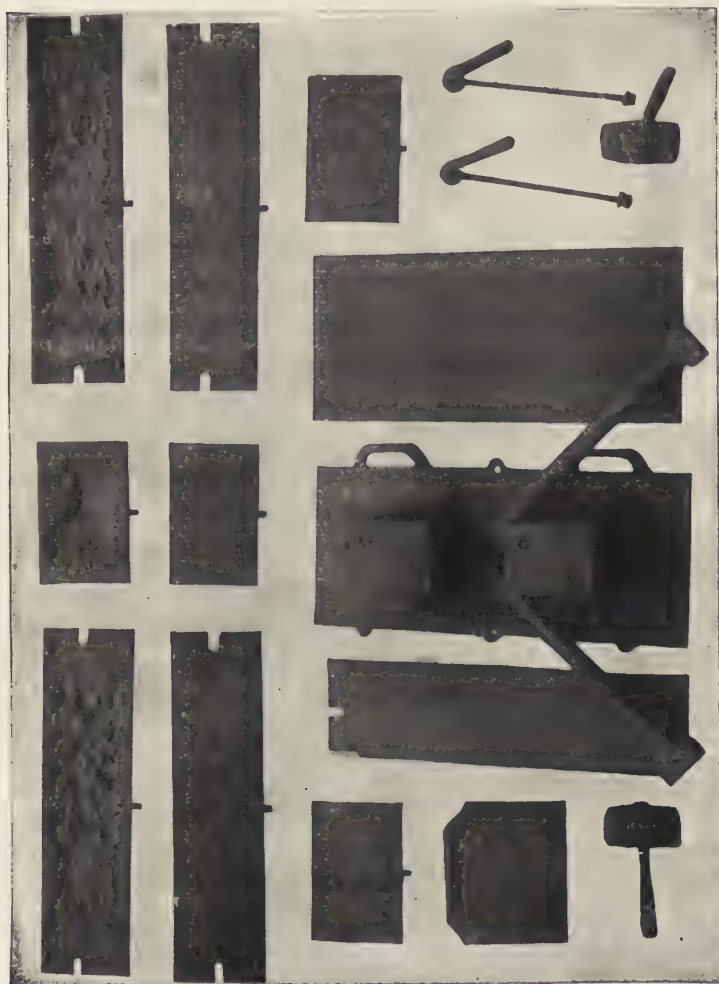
Full Set of Molds and Accessories forming a Simple Equipment of the Roll-over Type.
